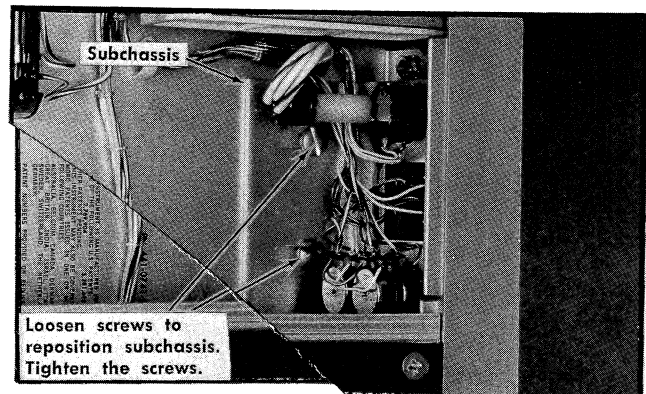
Bottom right-front portion of Type R520 showing location of the subchassis mounting screws.
